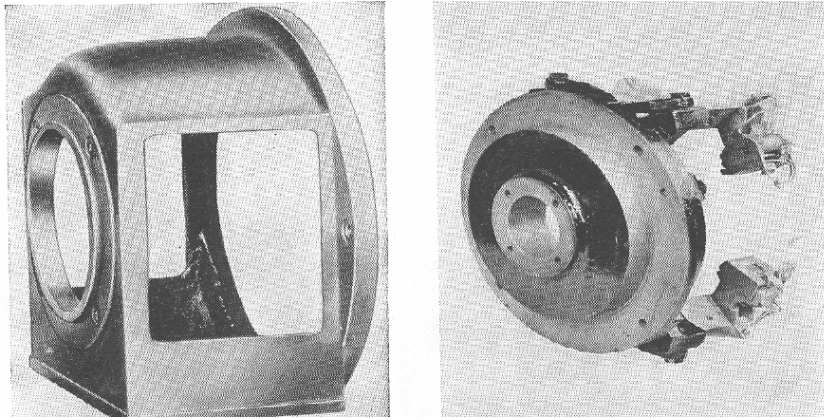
End shield and ball-bearing housing with brush yoke and brush rigging
